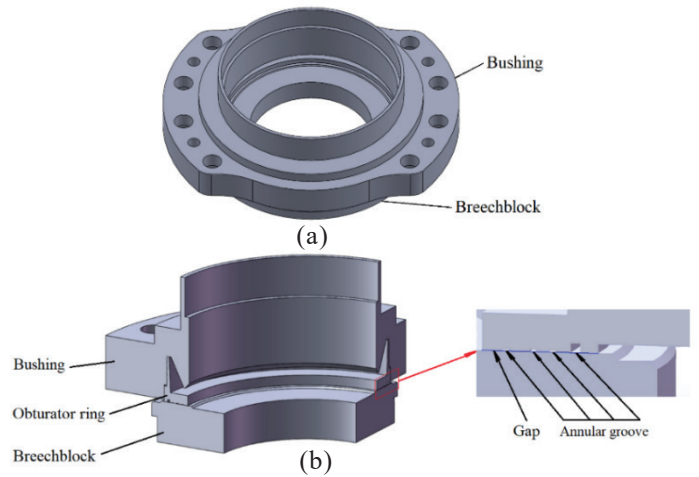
Geometry model of the obturator assembly: (a) Whole assembly and (b) Quarter of the assembly.
